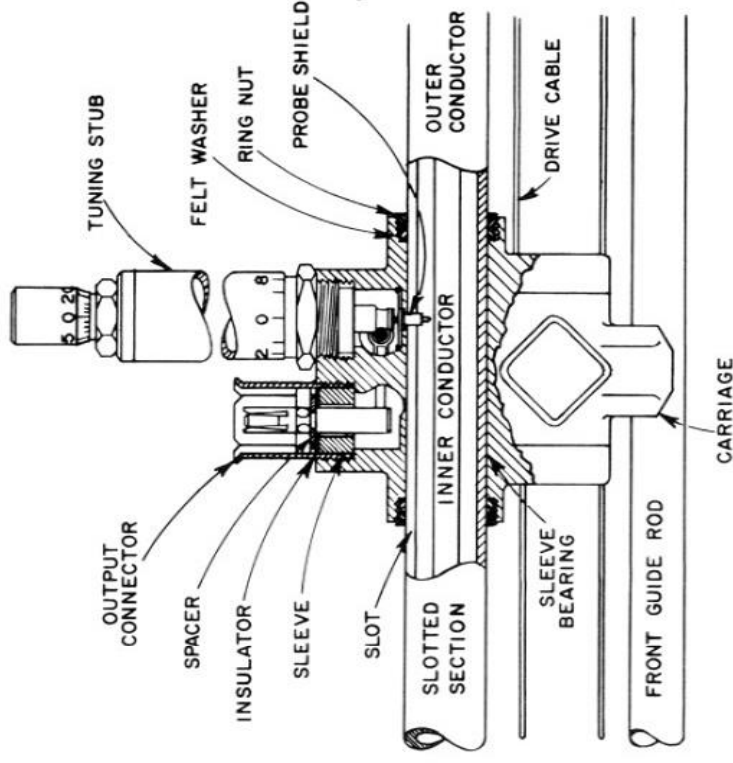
Type 900-LB construction details; carriage shown with probe-tuner assembly.
